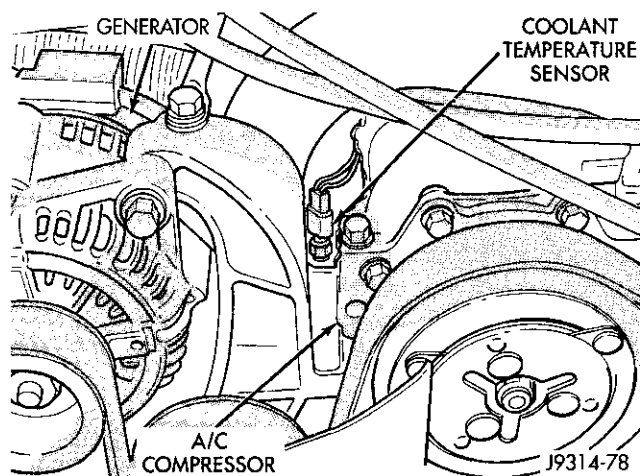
Engine Coolant Temperature Sensor—3.9L/5.2L/5.9L Engines—Typical
